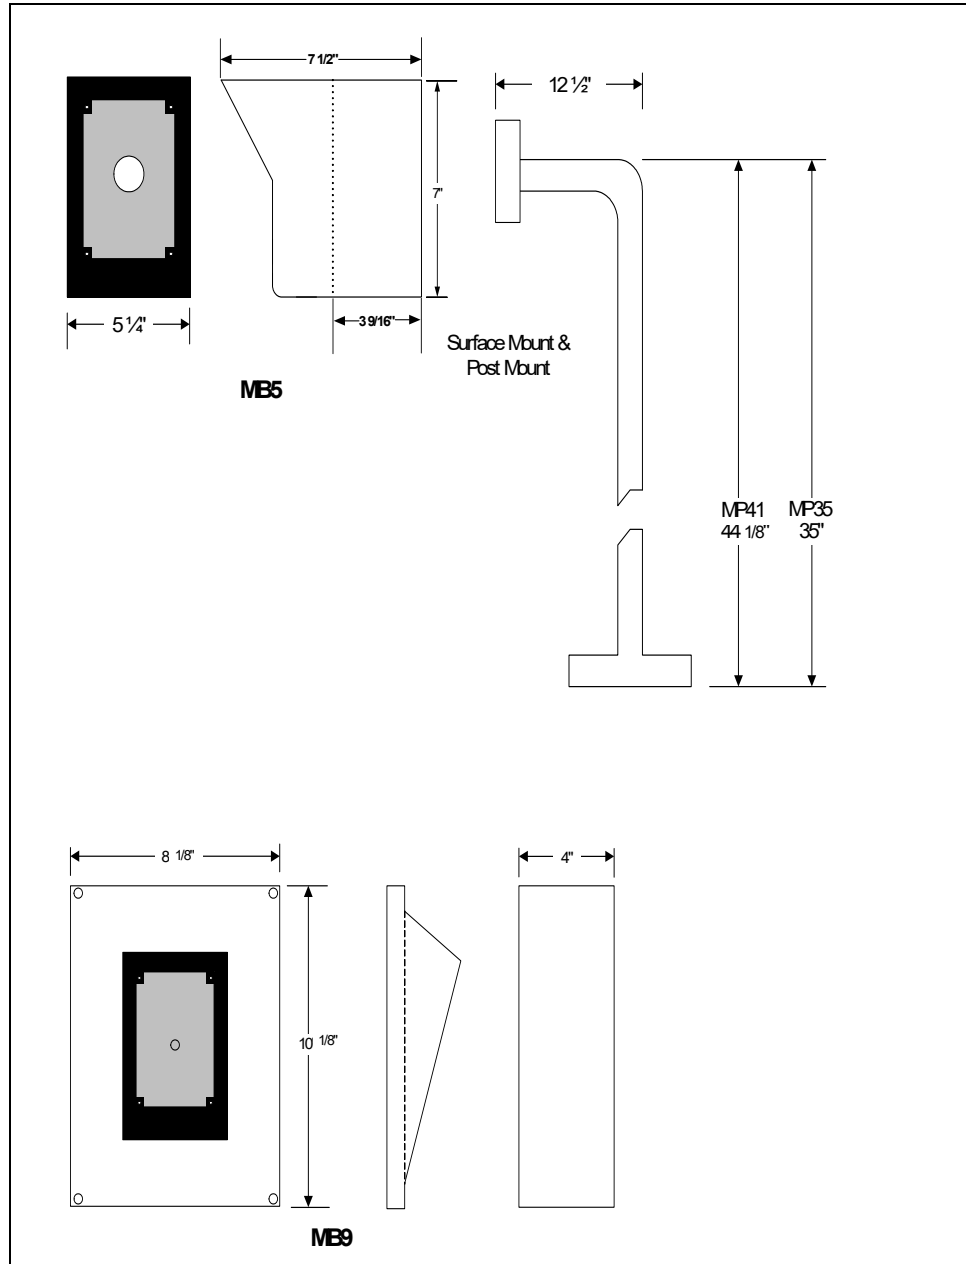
ScramblePad Mounting Boxes/Posts Dimensions - MB5, MB9, MP35, and MP41
